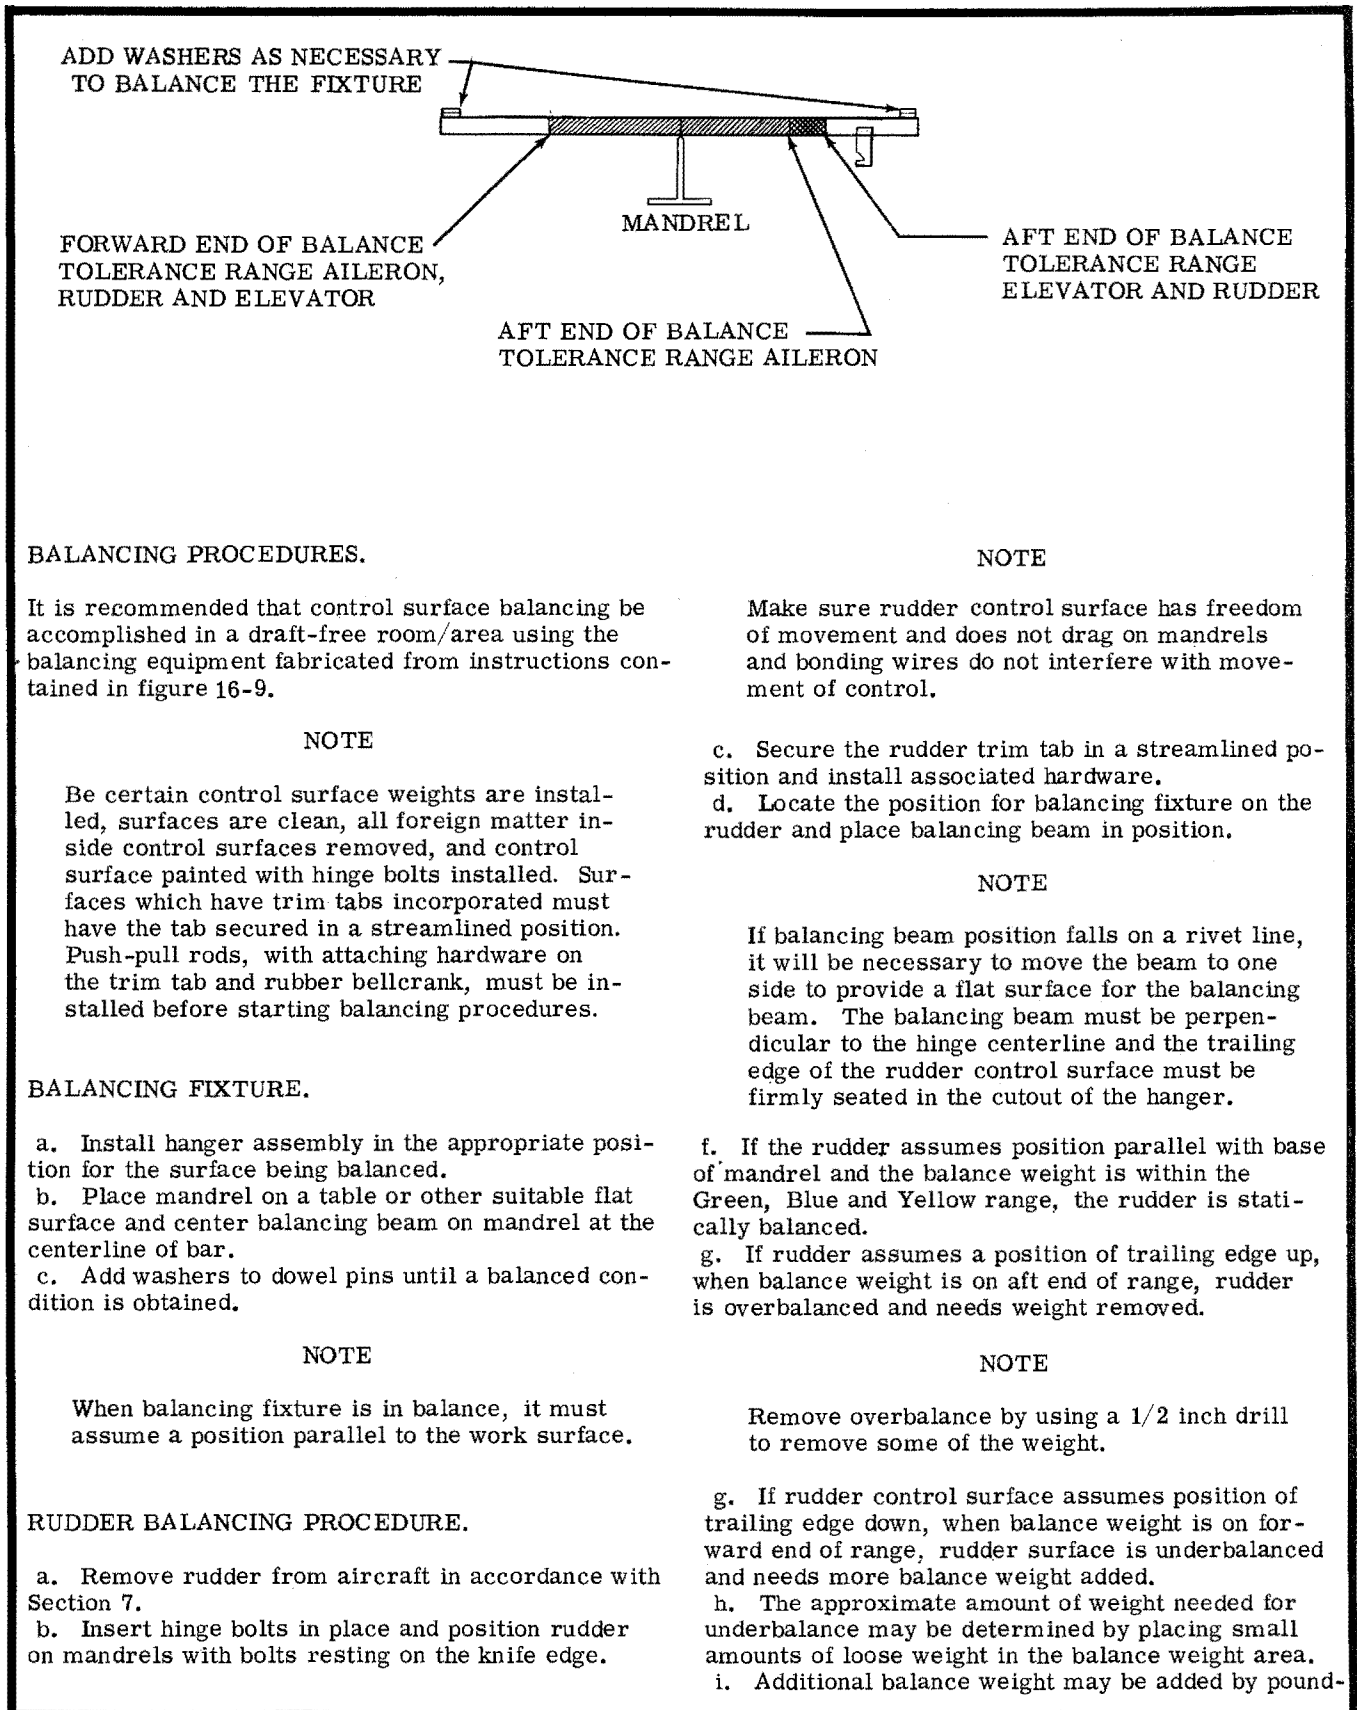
Static Balancing Aileron, Rudder and Elevator (Sheet 2 of 4)
